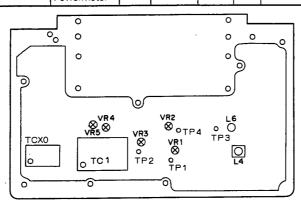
1200 MHz band adjustment: Component layout (upper view)
